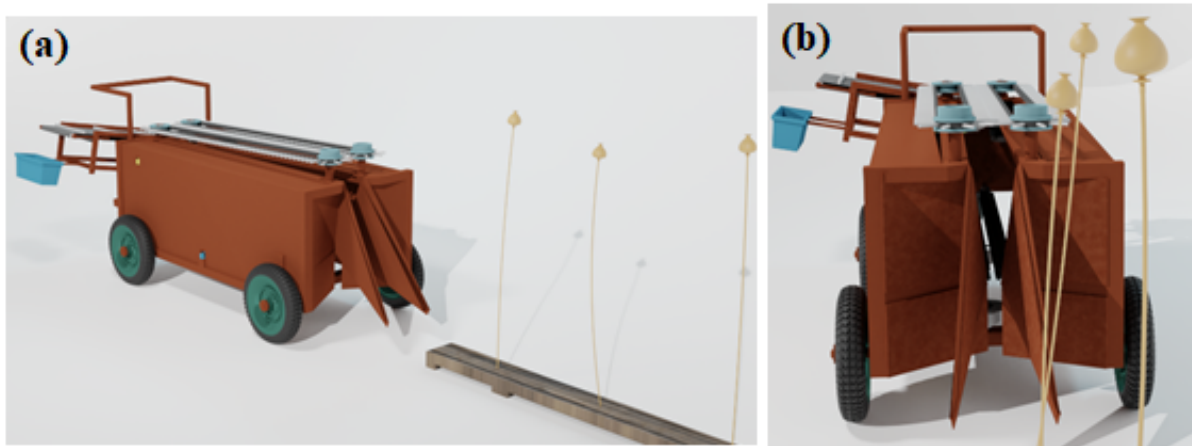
Prototype machine closed schematic solid model. a) Perspective view. b) Front view.
